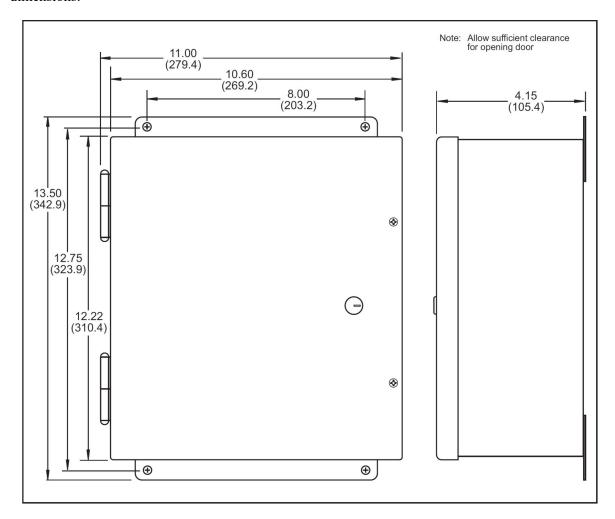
RamPAC Enclosure: Mounting Dimension
